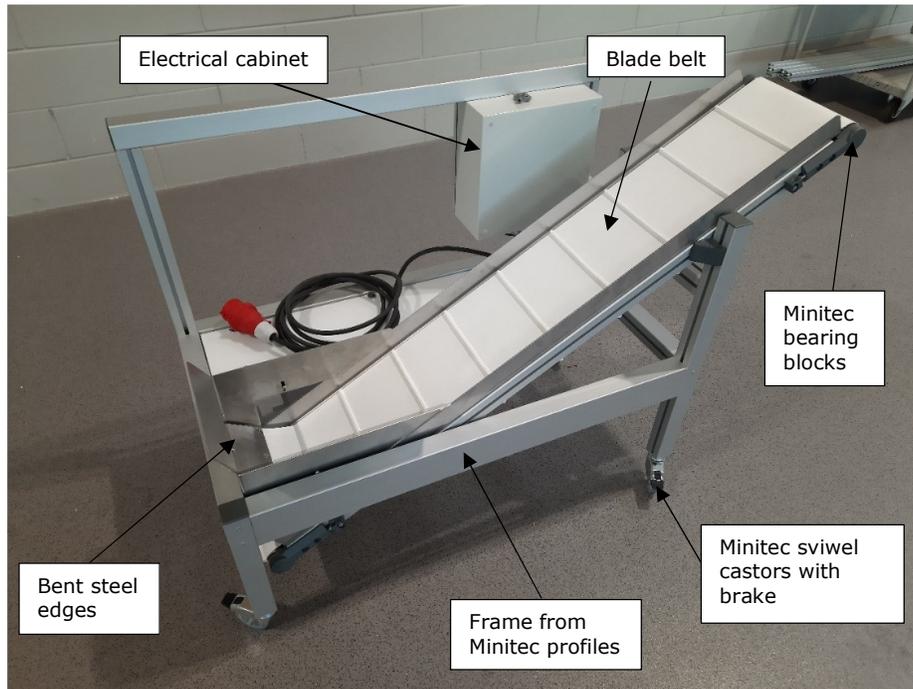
Mobile product buffer conveyor with sectioned belt [15]
